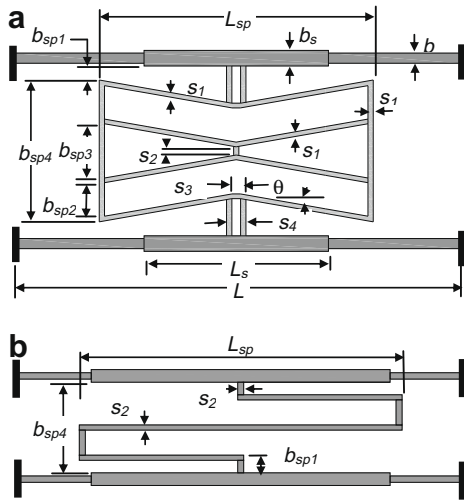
(a) Schematic of the Butterfly Spring; (b) zigzag shape spring.
